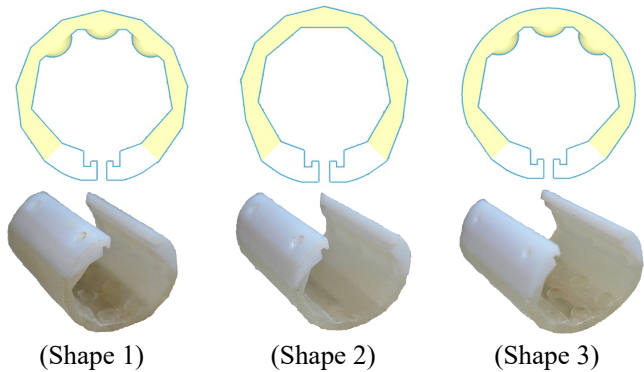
Outer grip (Shape 1: 9-sided cylinder with protrusions, Shape 2: 9-sided cylinder without protrusions, Shape 3: R shape with protrusions).
